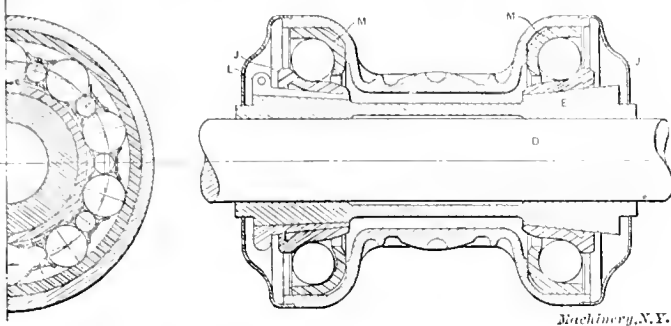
The Chapman Ball Bearing for Shaft Hangers.
